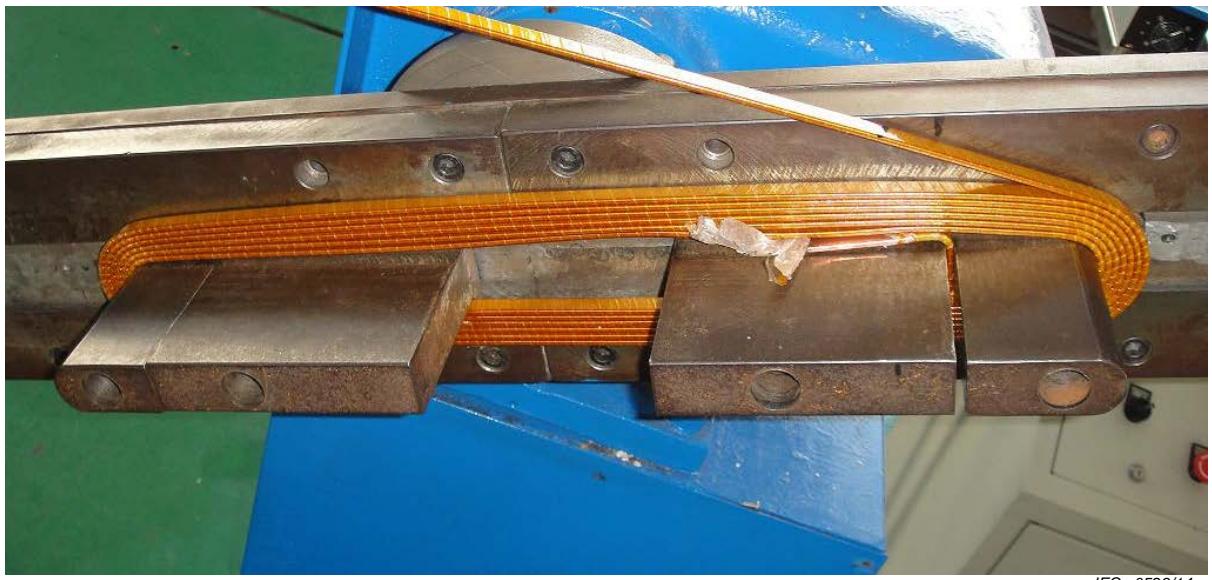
Rectangular winding wire shaped into un-formed coil on coil forming machine
